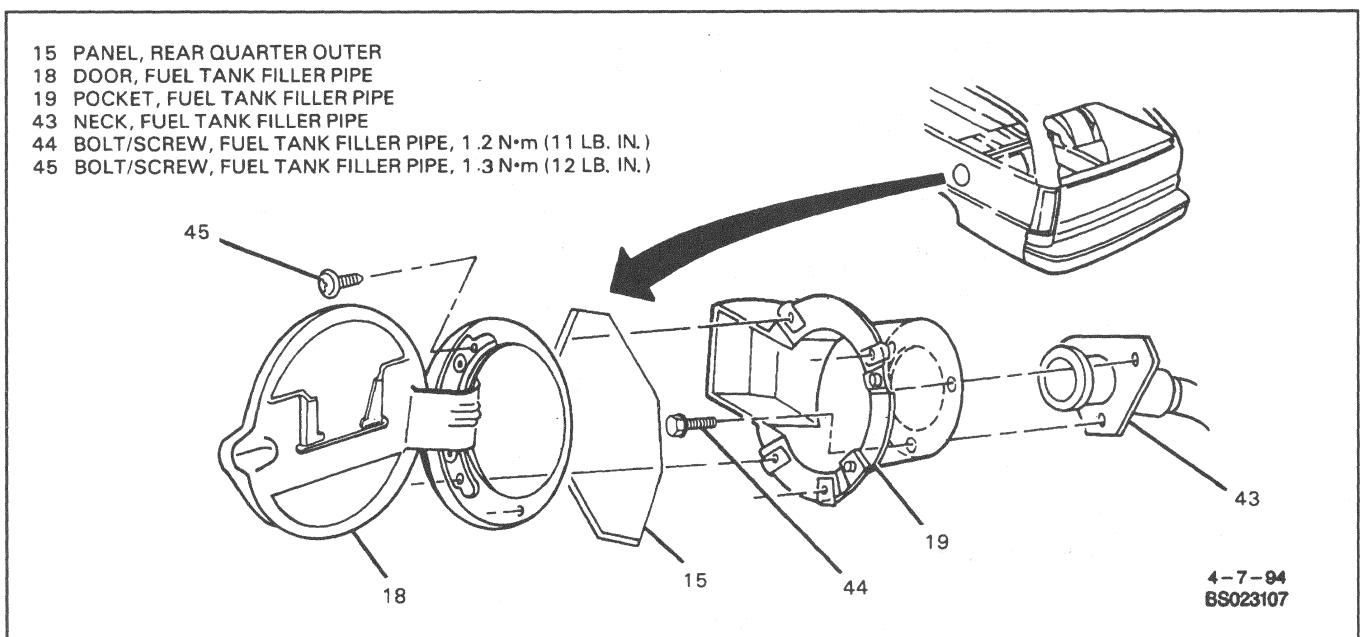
Fuel Tank Filler Pipe Door and Pocket - (Wagon)
